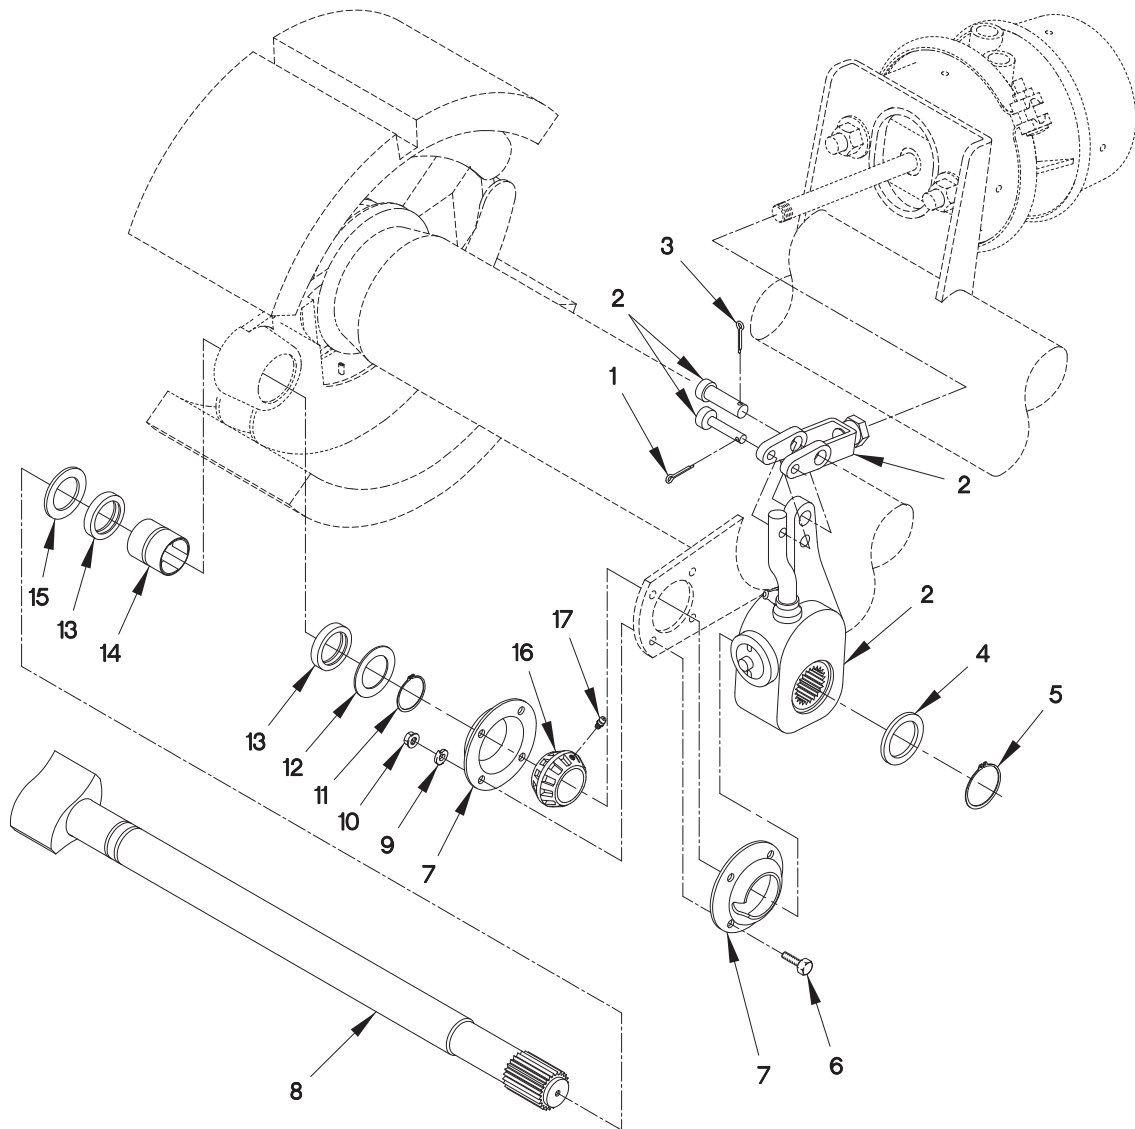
Group 1000 TURNTABLE (FRONT) AXLE & WHEEL END ASSEMBLY.
